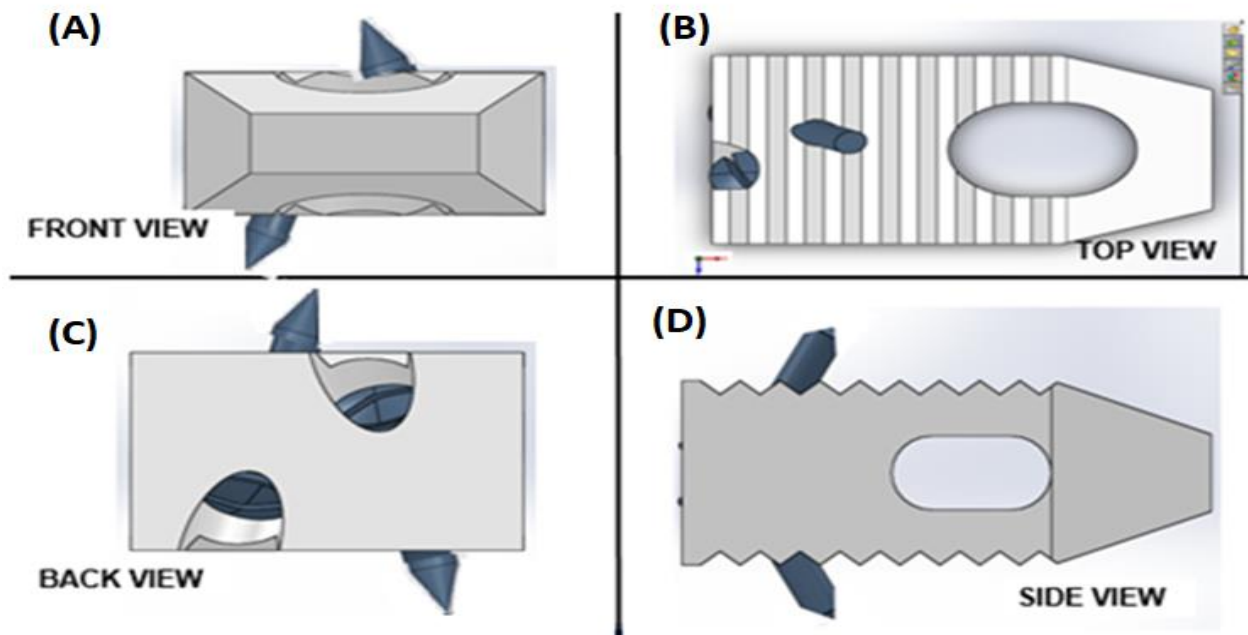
Three-dimensional model of cage implant for SLM-model-4: (A) Front view, (B) Top view, (C) Back view, (D) Side view
